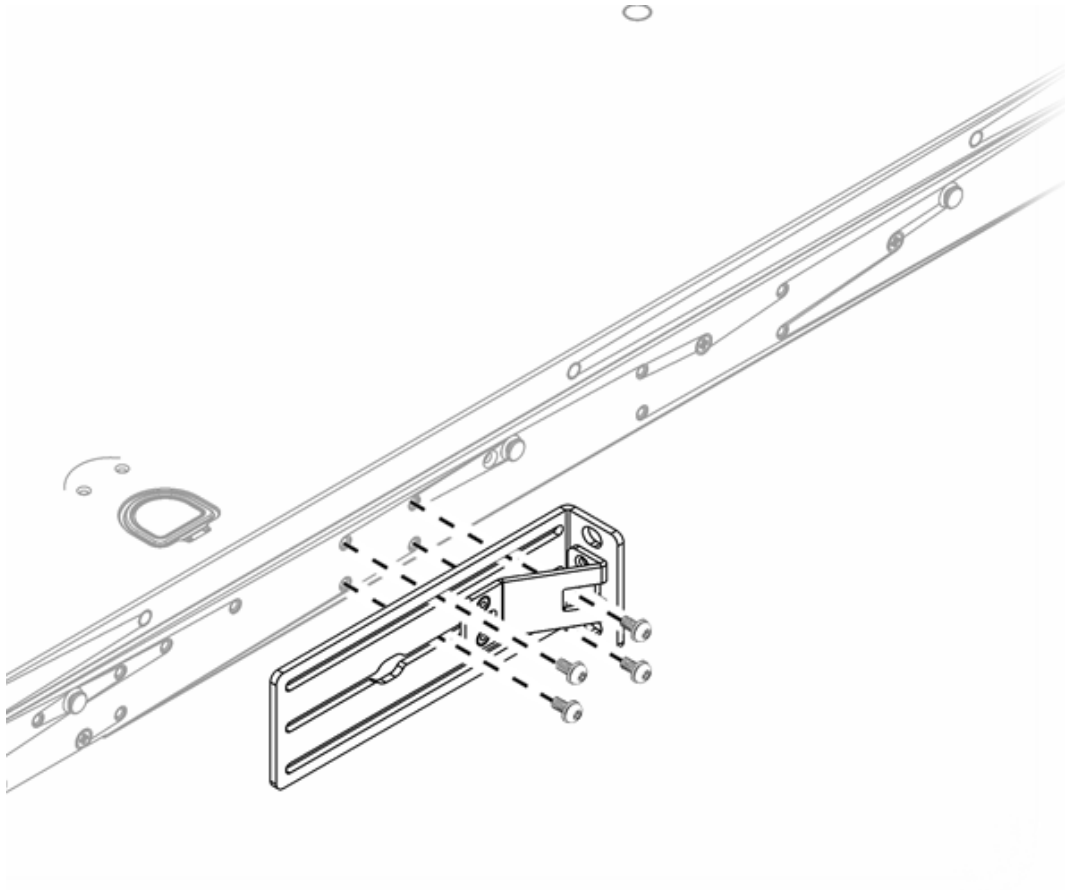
Attaching a Long Mounting Bracket: Middle of Switch
